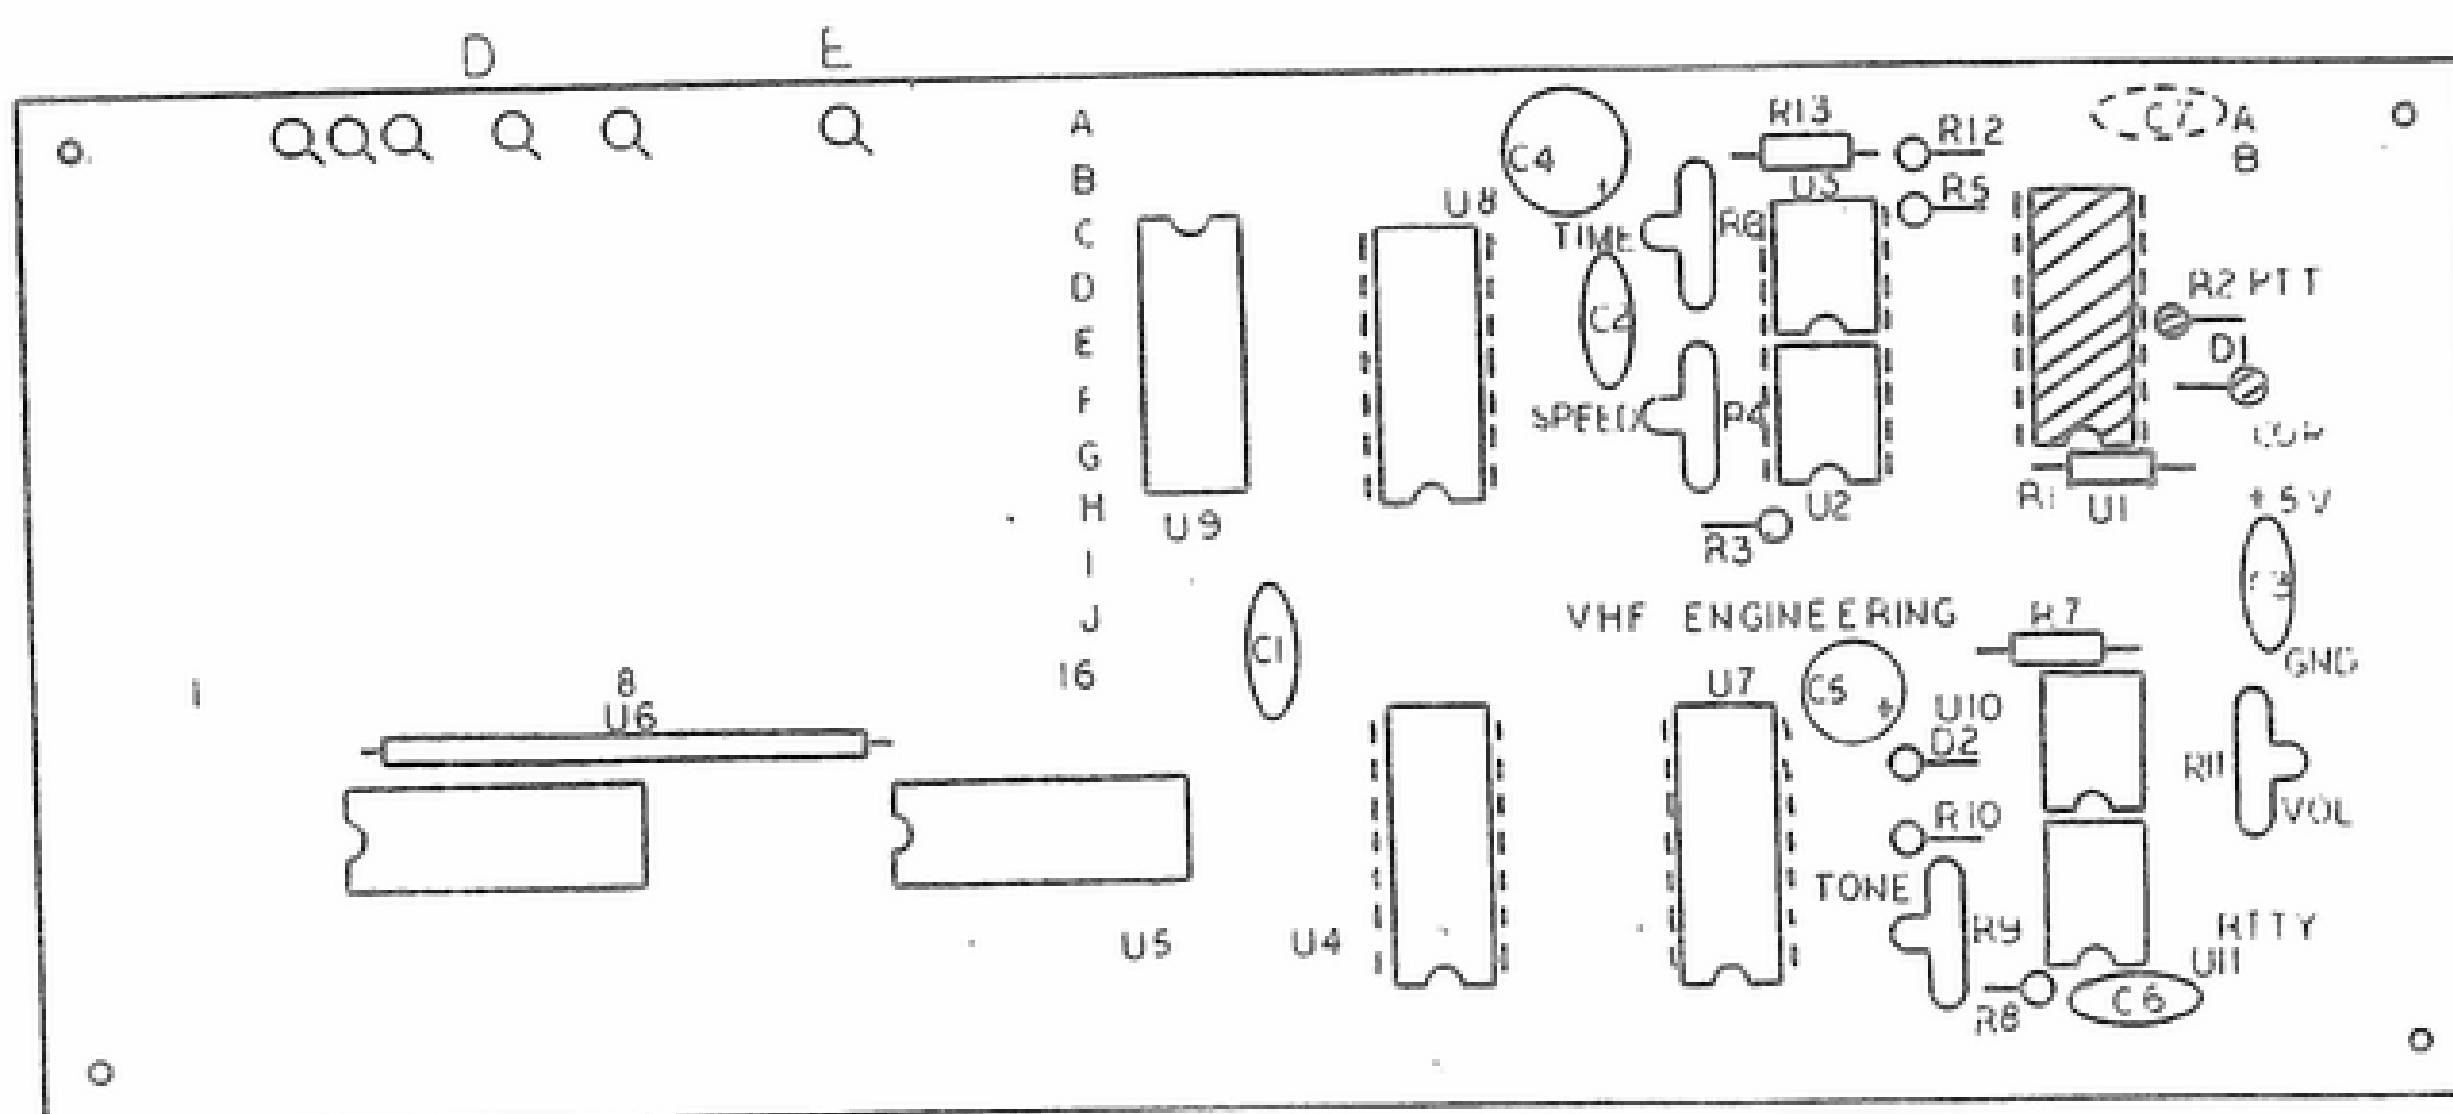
PARTS LAYOUT. REMOVE SHADED PARTS.
